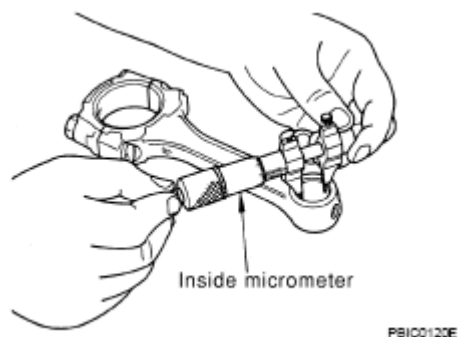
Measuring Inner Diameter Of Connecting Rod Bushing With Inside Micrometer
